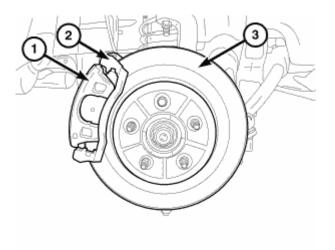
Front Disc Brake Rotor Courtesy of CHRYSLER LLC
